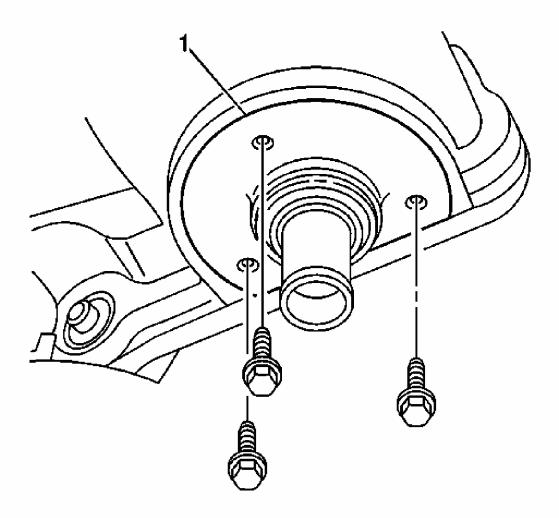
Identifying Camshaft Seal Bolts Courtesy of GENERAL MOTORS CORP.
